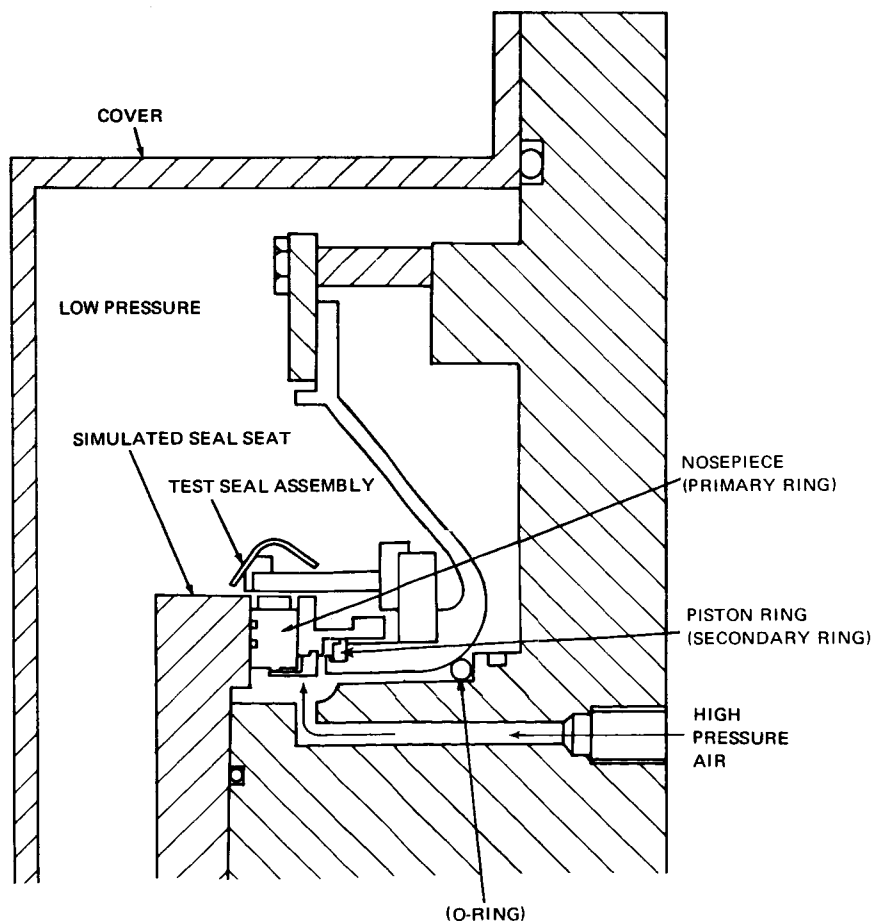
Schematic Diagram of Pressure Check Fixture for the Seal
